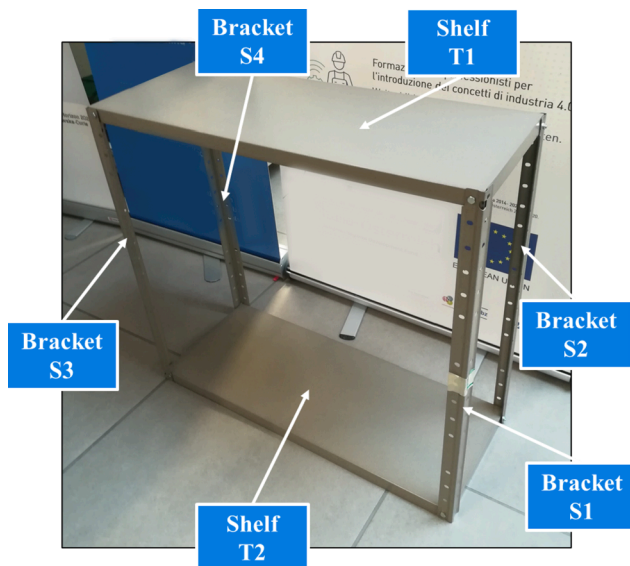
Medium-sized metal furniture for collaborative assembly.
